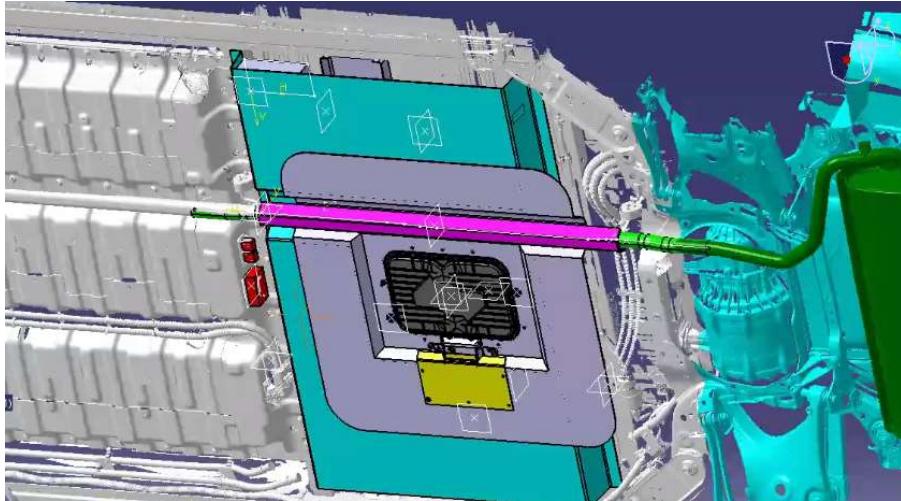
Concept illustration of the revised VA and electromagnetic shield packaging for the LEVC showing positioning behind the traction battery pack and the approach to accommodate the exhaust of the internal combustion engine
